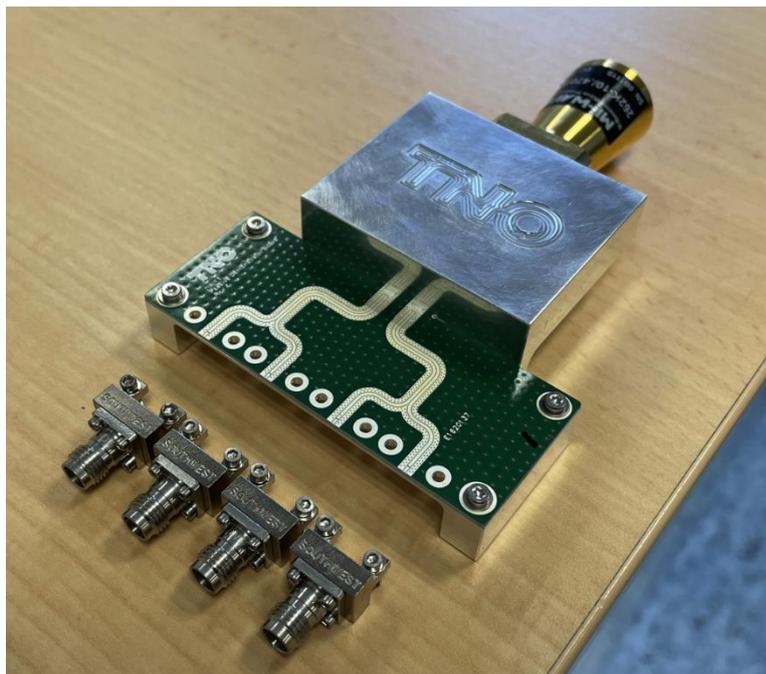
DRIFT assembled passive antenna demonstrator.
